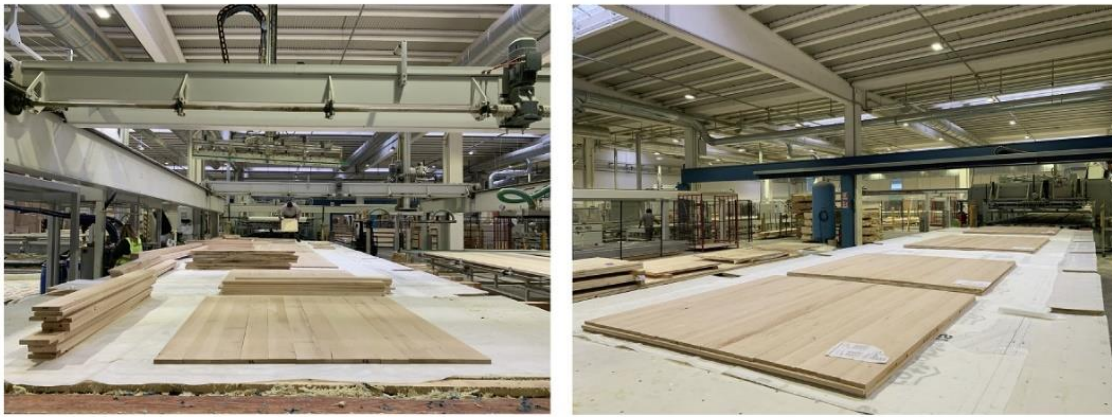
Master Panels: left) Assembly phase; right) After pressing.
